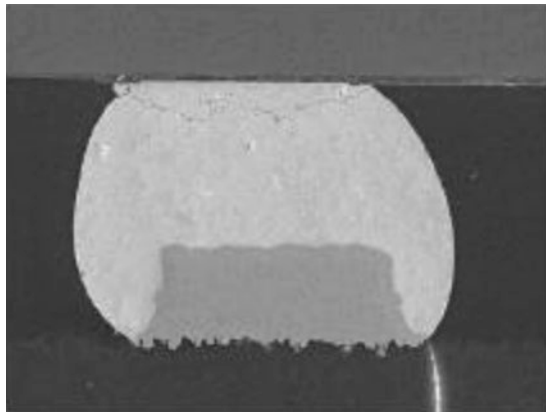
Fatigue cracks at the flip-chip interface for 95.5Sn3.5Ag1.0Cu solder bumps
